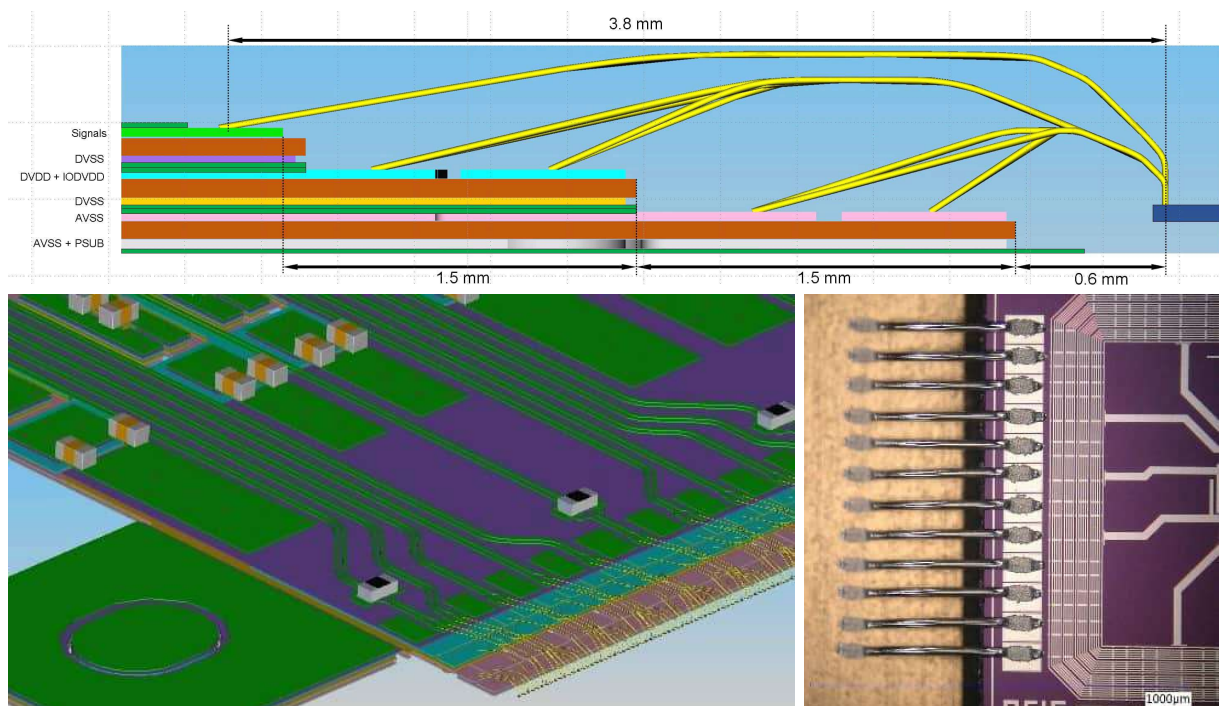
Details of the Wire-bonded interconnection. (a) Side view of the FPC, sensor and wire bonds, (b) 3D view of a wire bonded FPC section and (c) photography of wire-bonding between FPC and dummy sensor.
